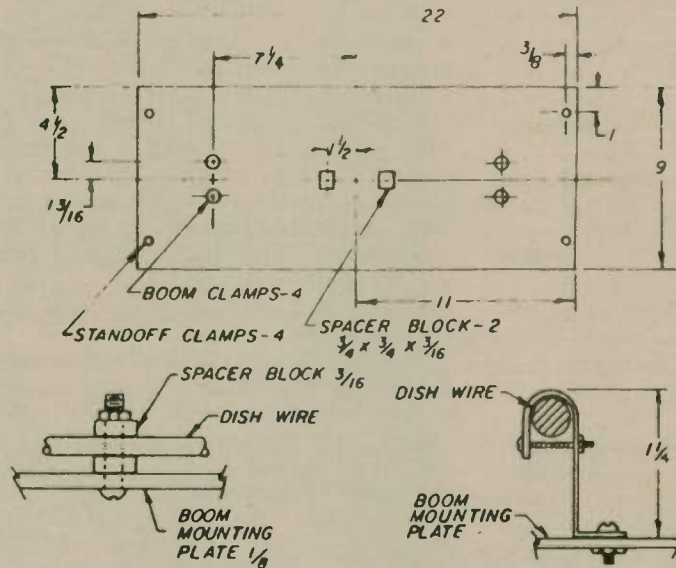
Dish mounting plate clamps and spacers; dimensions in inches
